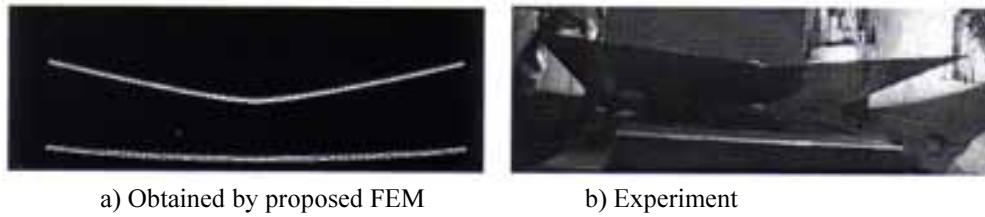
The front view of deformed welded shells exactly before removing torch.
